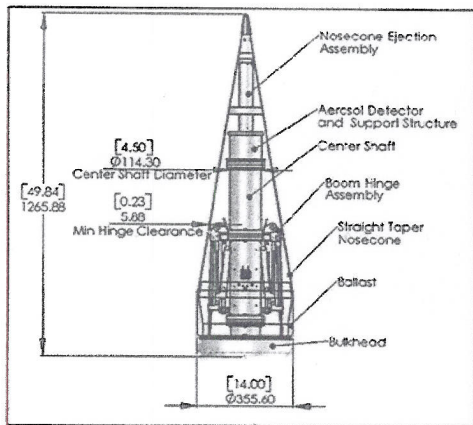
ESPRIT Boom Geometric Constraints (bracketed dimensions in inches)
